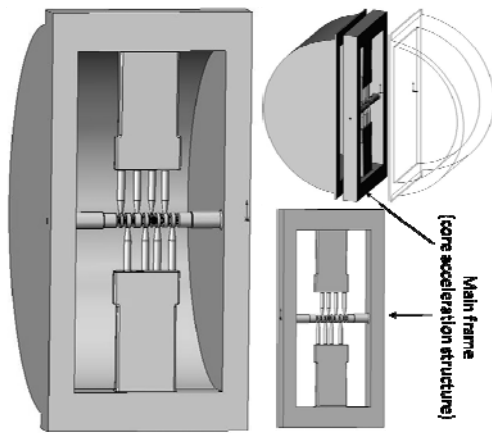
A 3-D illustration of the cavity, fabricated using the 5-axis NC high accuracy machining method.
